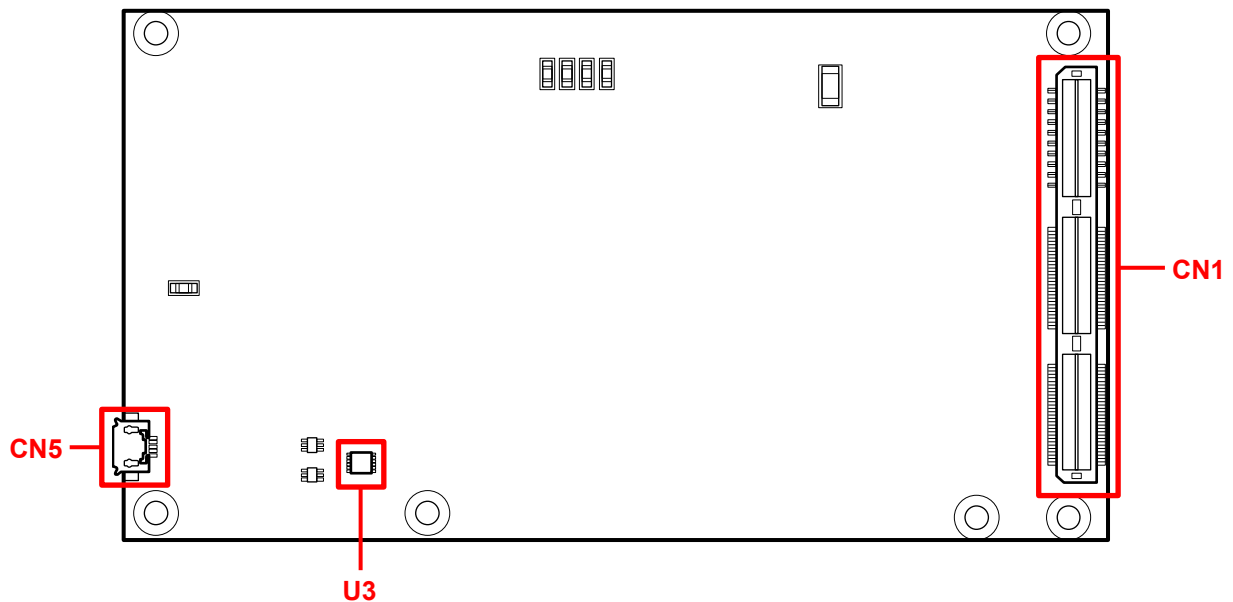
USB 3.0 Type-C PD Card Layout (Bottom View)
